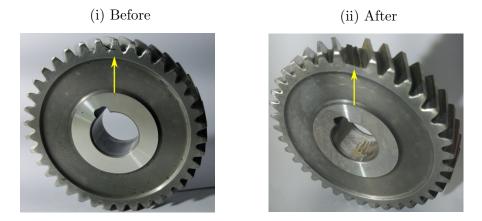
The gear with localised gear damage is presented. In Figure 8(i), the gear before the fatigue experiment is presented, while in Figure 8(ii) the gear after the fatigue experiment is presented.
